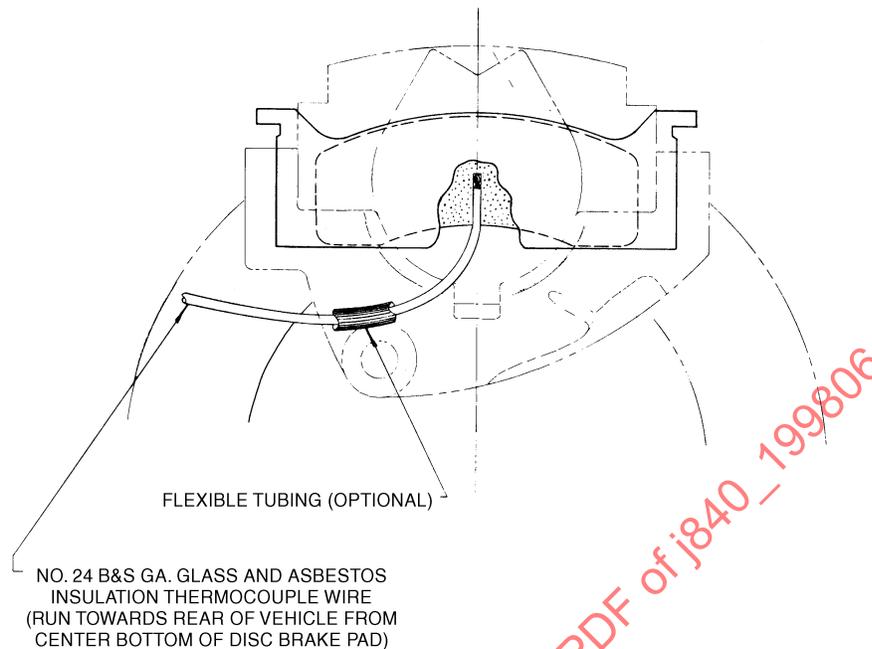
B—DRAWING OF THERMOCOUPLE LOCATION—DISC BRAKE
